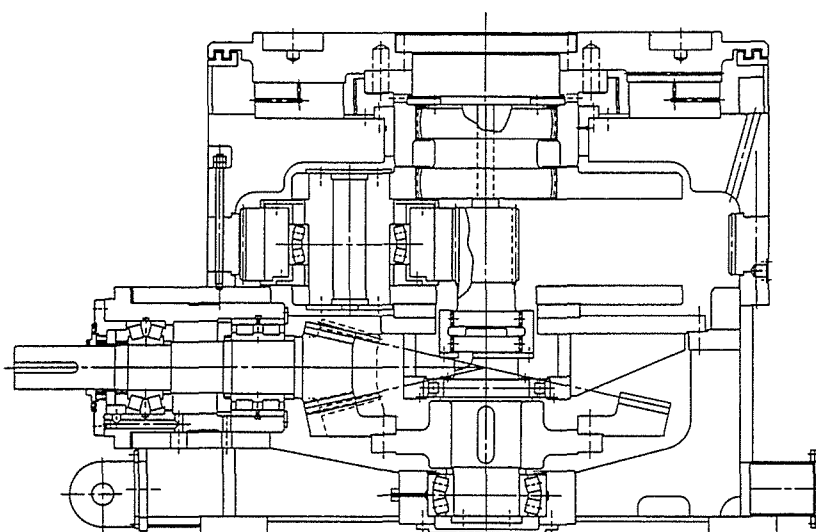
Bevel-planetary reduction gear for roller mill
